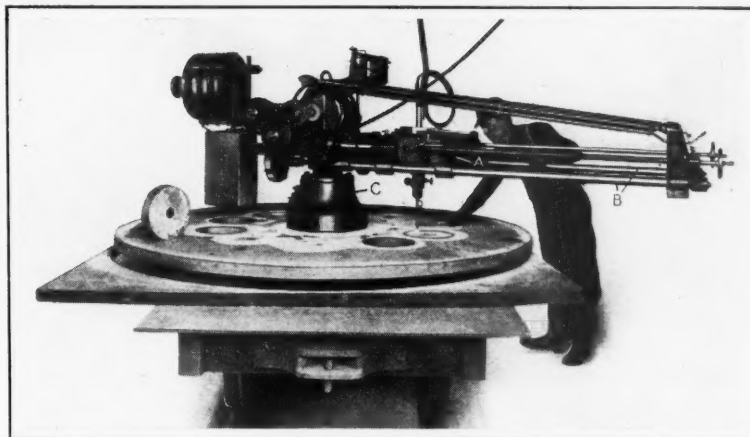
Cutting Circular Pieces from Heavy Steel Plate by Means of an Oxy-illuminating Gas Torch
